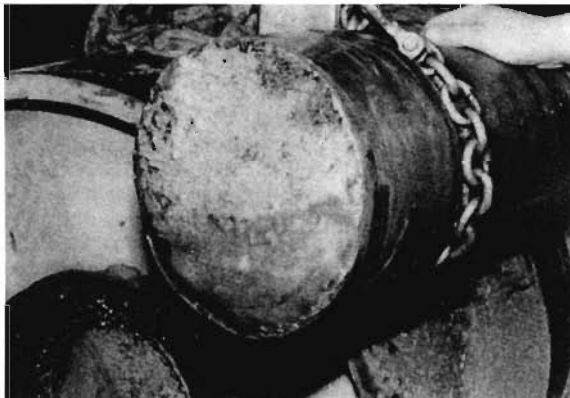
SHAFT FATIGUE FAILURE AT LOCKING DEVICE SHOULDER
